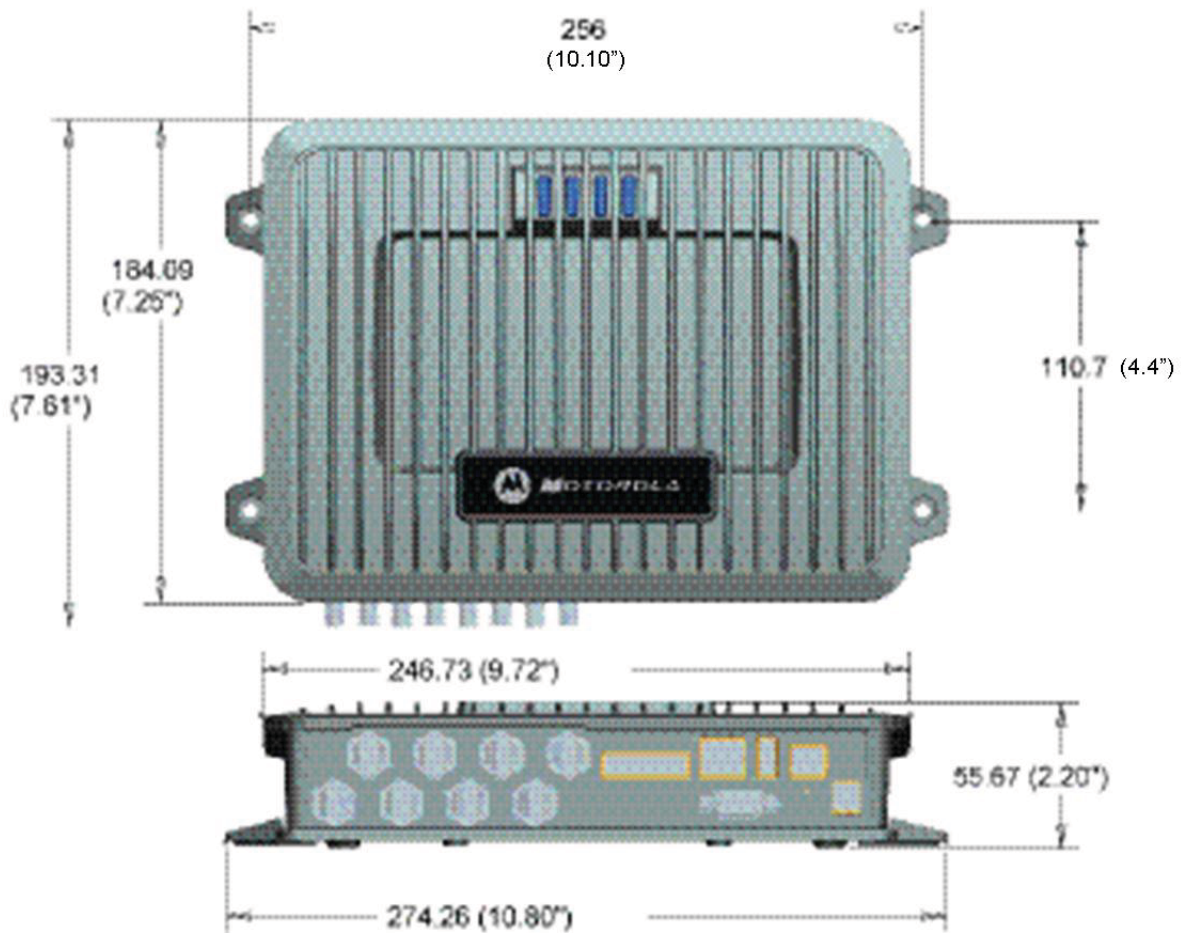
FX9500 Mechanical Dimensions (dimensions in mm)
